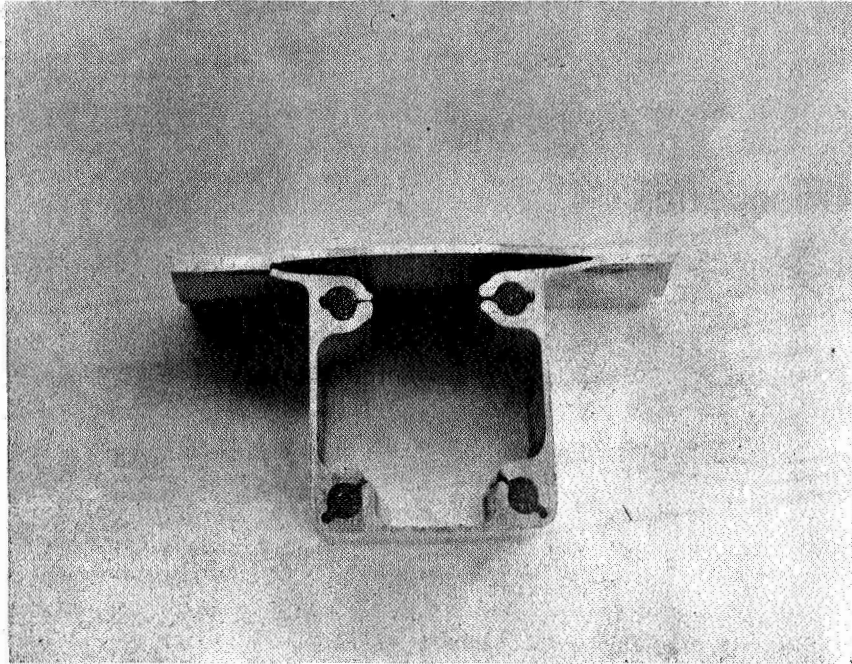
SECTION THROUGH FAILED HAT STRINGER
